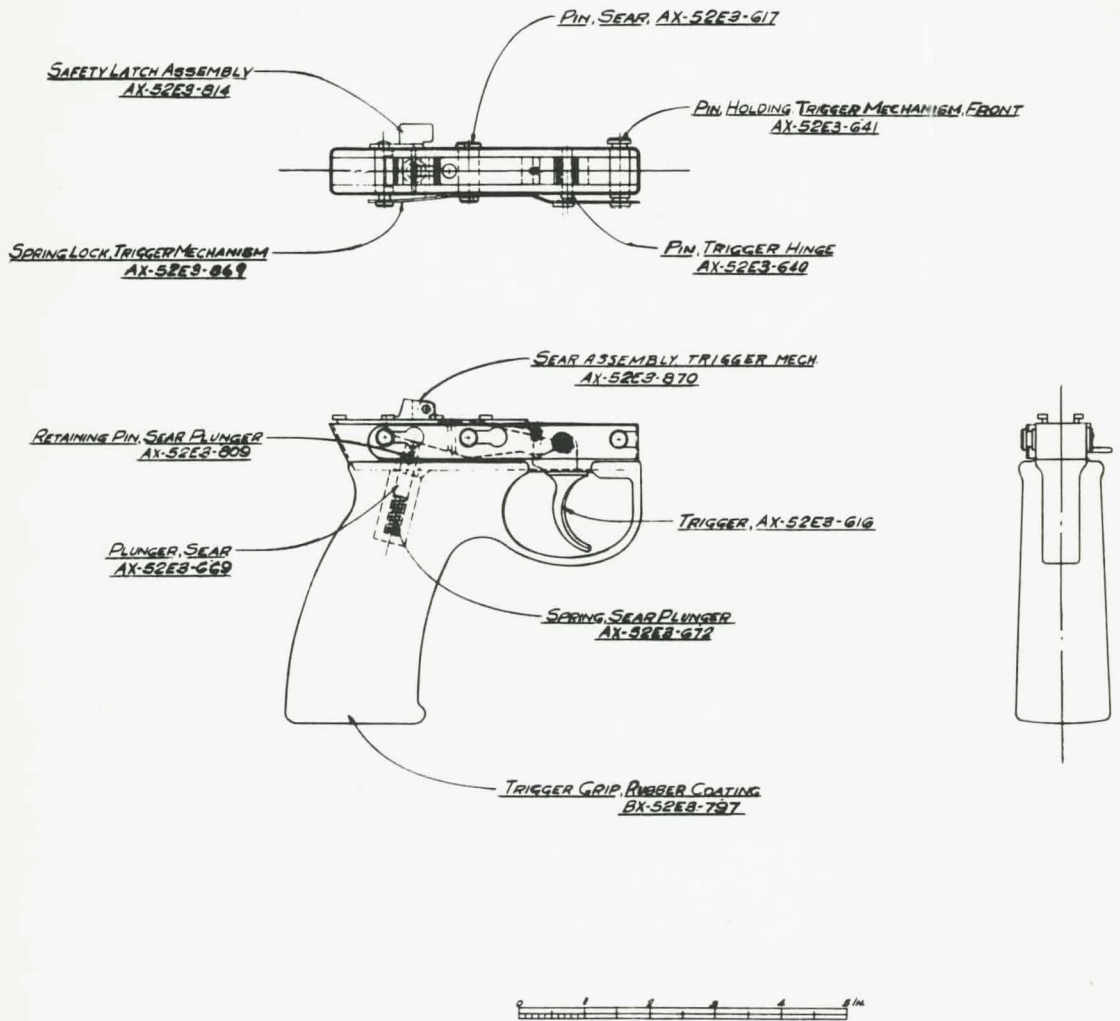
TRIGGER MECHANISM ASSEMBLY
